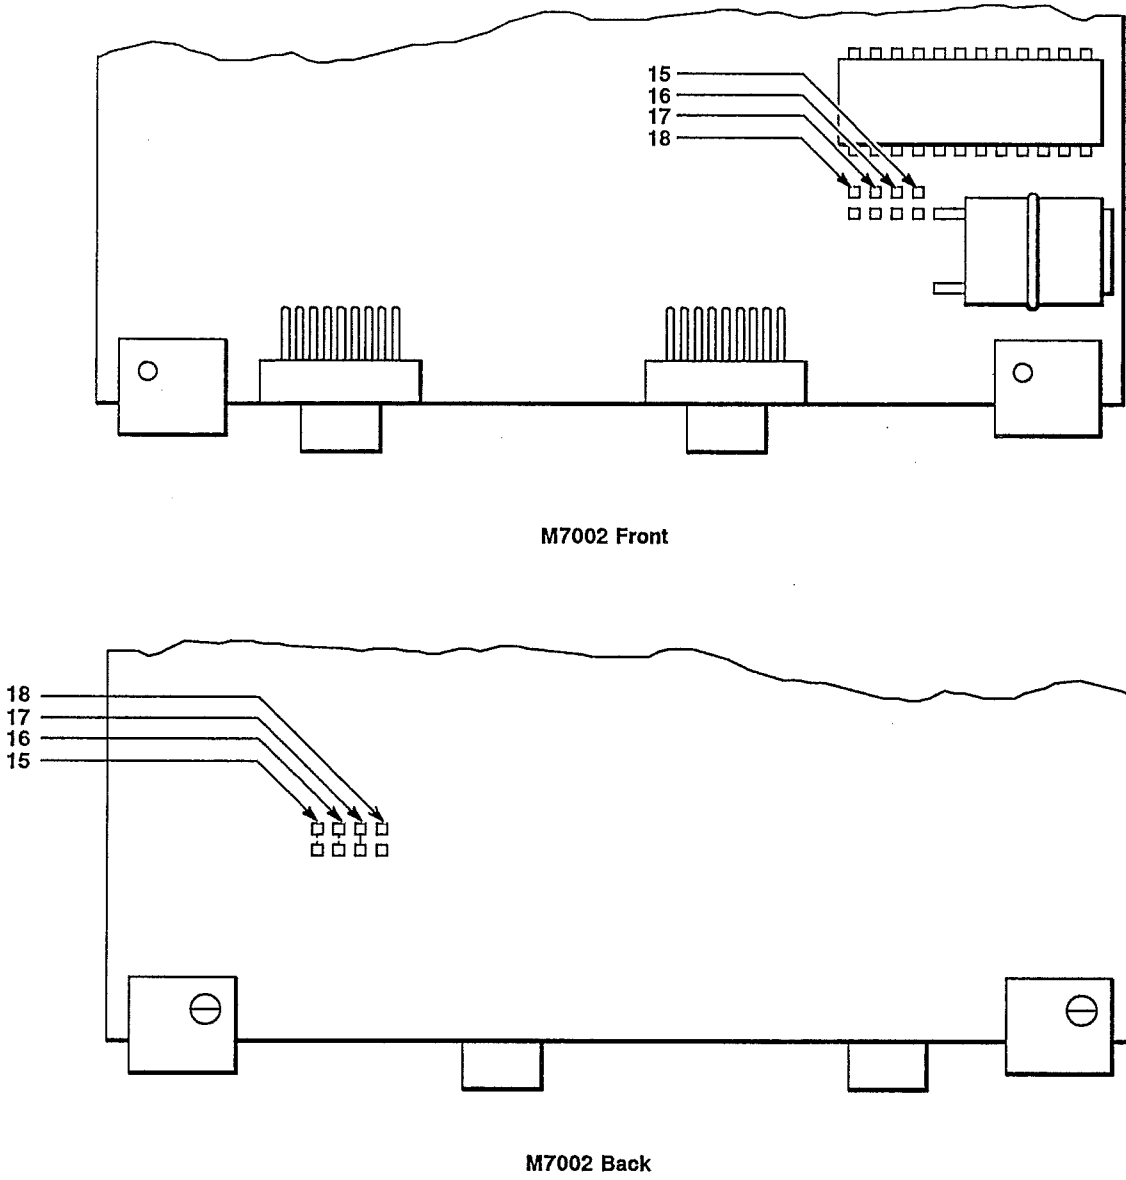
Front and back views of M7002 circuit board, showing baud rate solder pads.
